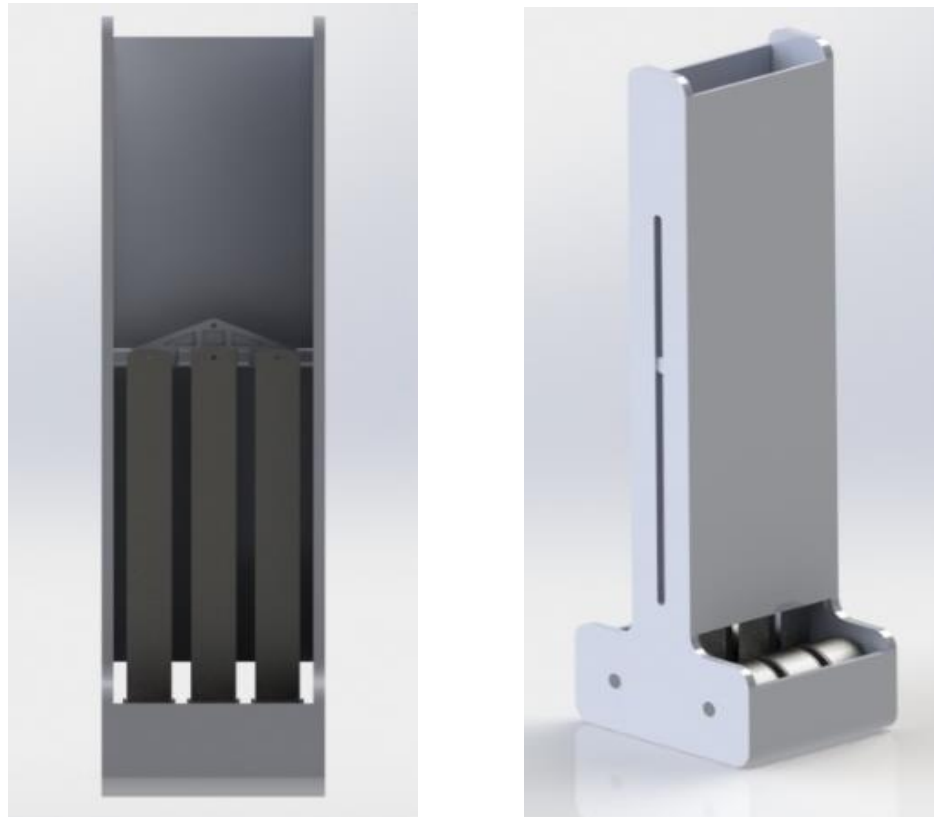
Housing structure for constant-force spring coils including extension guides. Left shows the springs connected to the guide system. Right shows the complete assembly.
